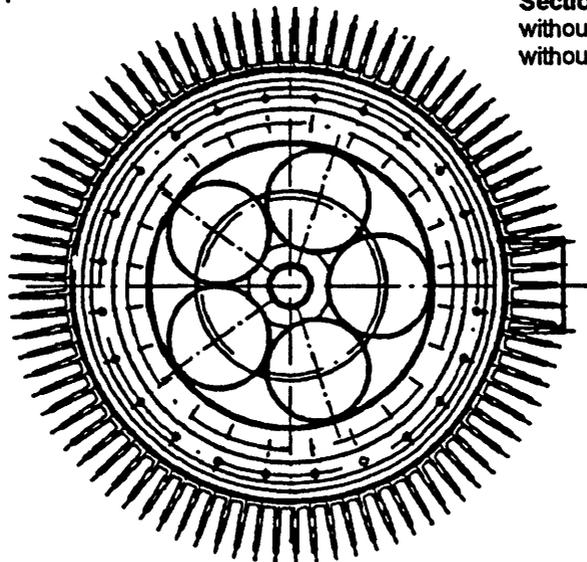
Multiple Transport Cask, Castor GSF-5 (dimensions in mm)
